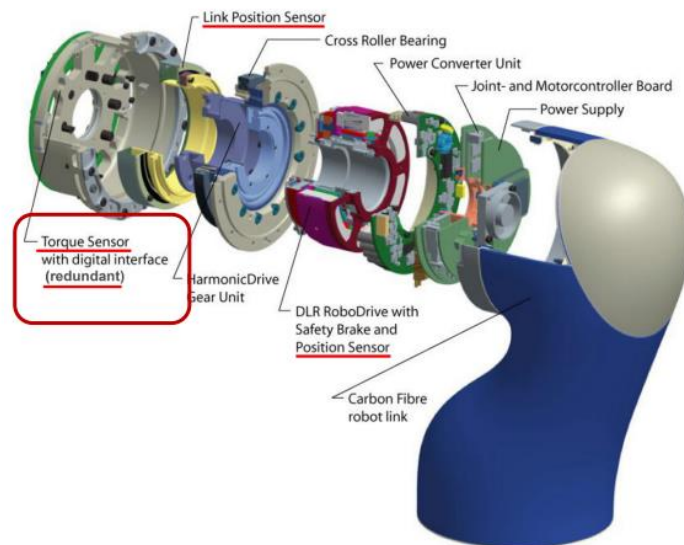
Torque sensor mounted between the link side and motor side [67].
